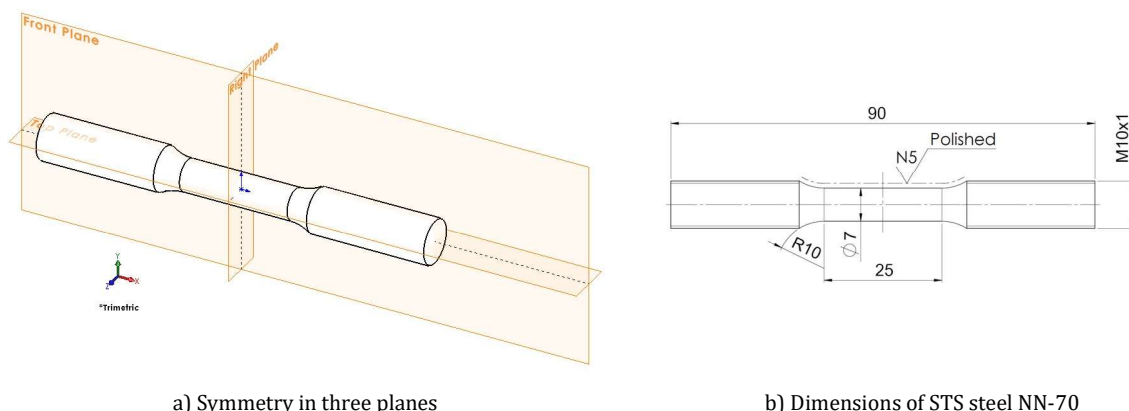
Specimen for LCF test of steel NN-70 [9–33]
